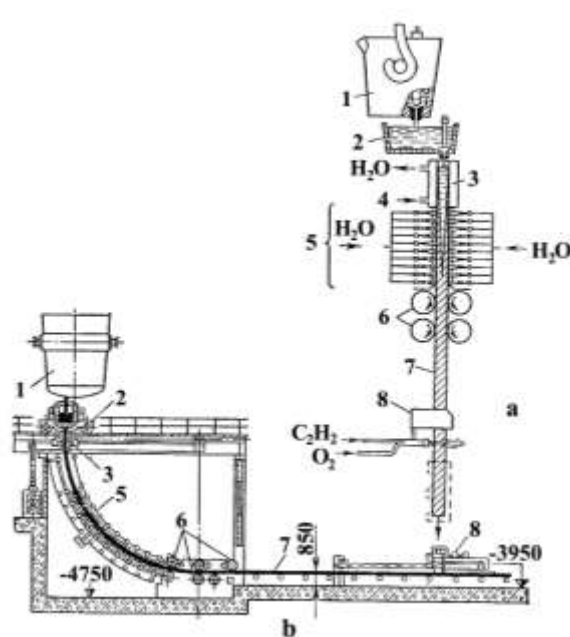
Continuous casting: 1 – stopper ladle; 2 – intermediate ladle (tundish); 3 – water-cooled mould; 4 – water; 5 – zone of secondary cooling; 6 – drawing rollers; 7 – billet; 8 – cutting mechanism
